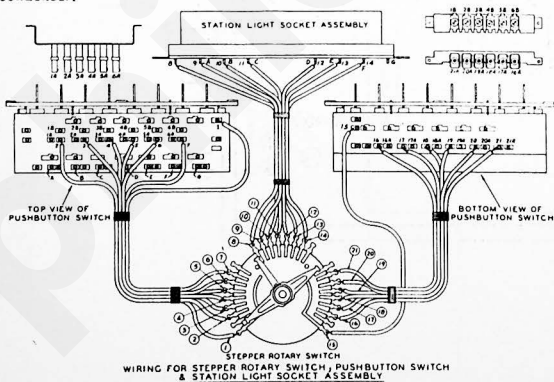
CABLE WIRING FROM STEPPER ROTARY SWITCH TO PUSH-BUTTON SWITCH AND STATION LIGHTS
